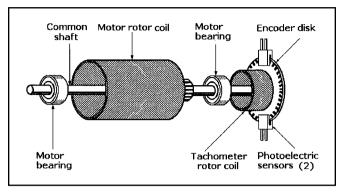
The rotors of the DC motor and tachometer share a common shaft.
